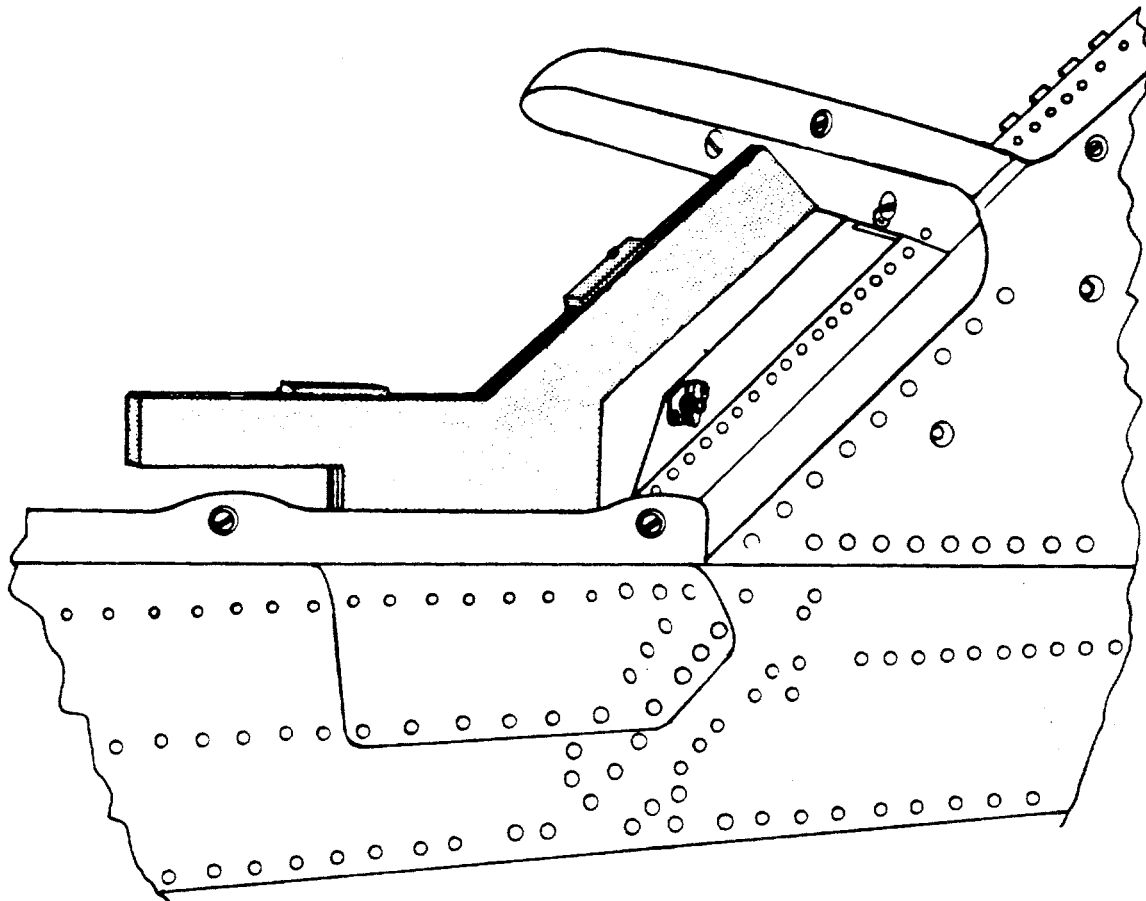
ALIGNMENT FIXTURE (42° GEARBOX)
